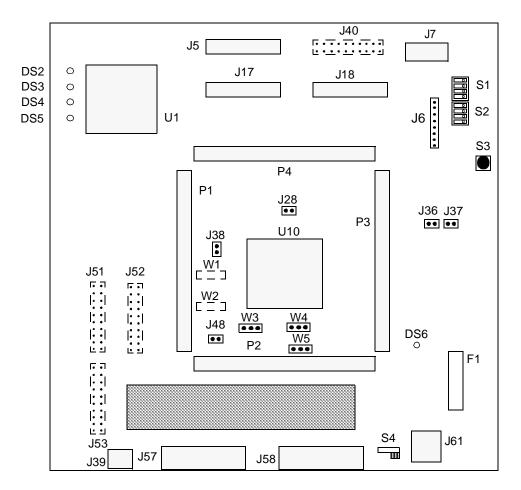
MMCCMB2114 Controller and Memory Board Layout
